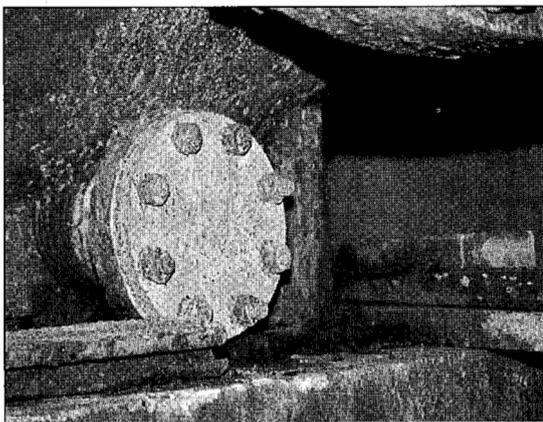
The rotary valve's 4-inch auxiliary body flush valve installation location showing the temporary blind flange.
